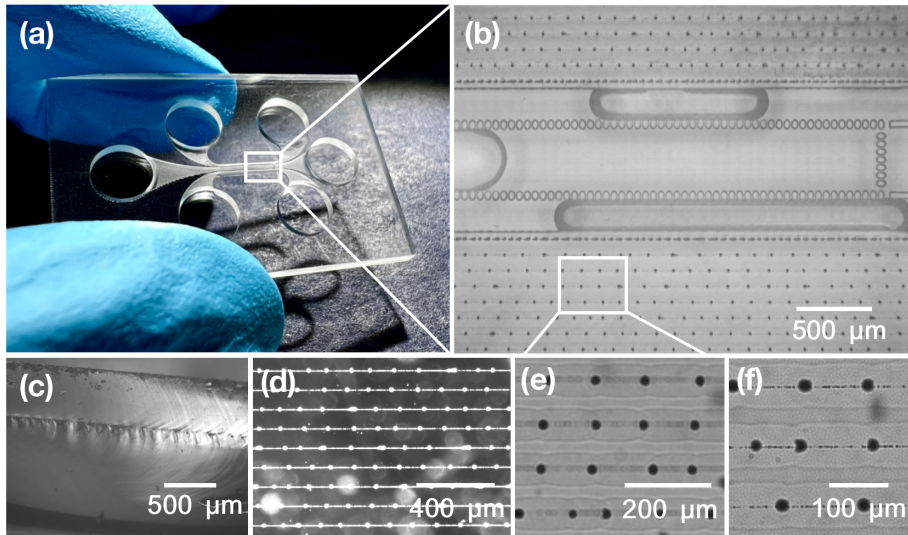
(a) Picture of a final liver-on-chip device. (b) Optical picture of produced microfluidic chip part where channel with filter and welding seams can be observed. (c) Cross section of the welded chip. (d) Welding seams optical microscope picture made with crossed polarizers. (e) and (f) Optical photos of welding seams with different magnifications.
